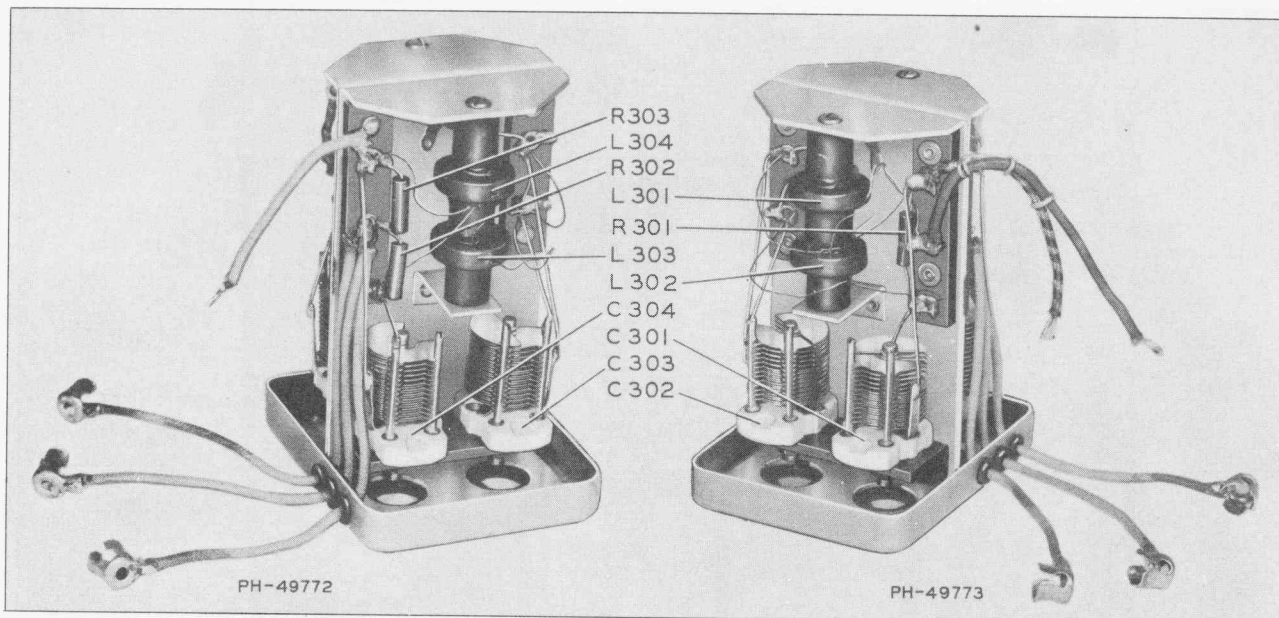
Typical Circuit Assembly (First Stage, 450 KC Section, Front and Rear Views)
